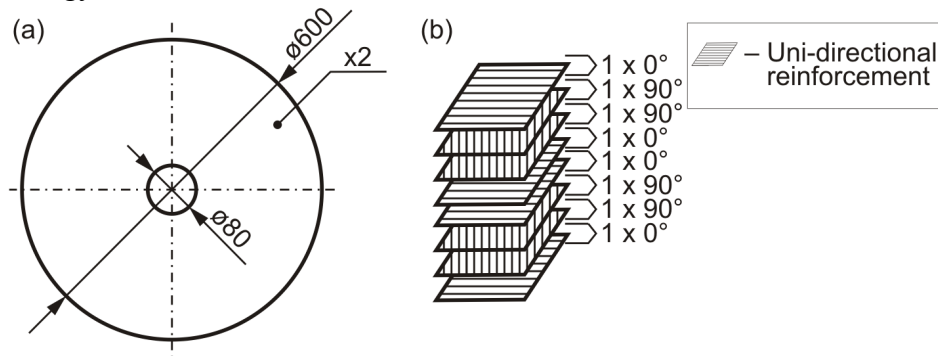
Dimensions of the rotor (a), and composite layup of the rotor (b).
